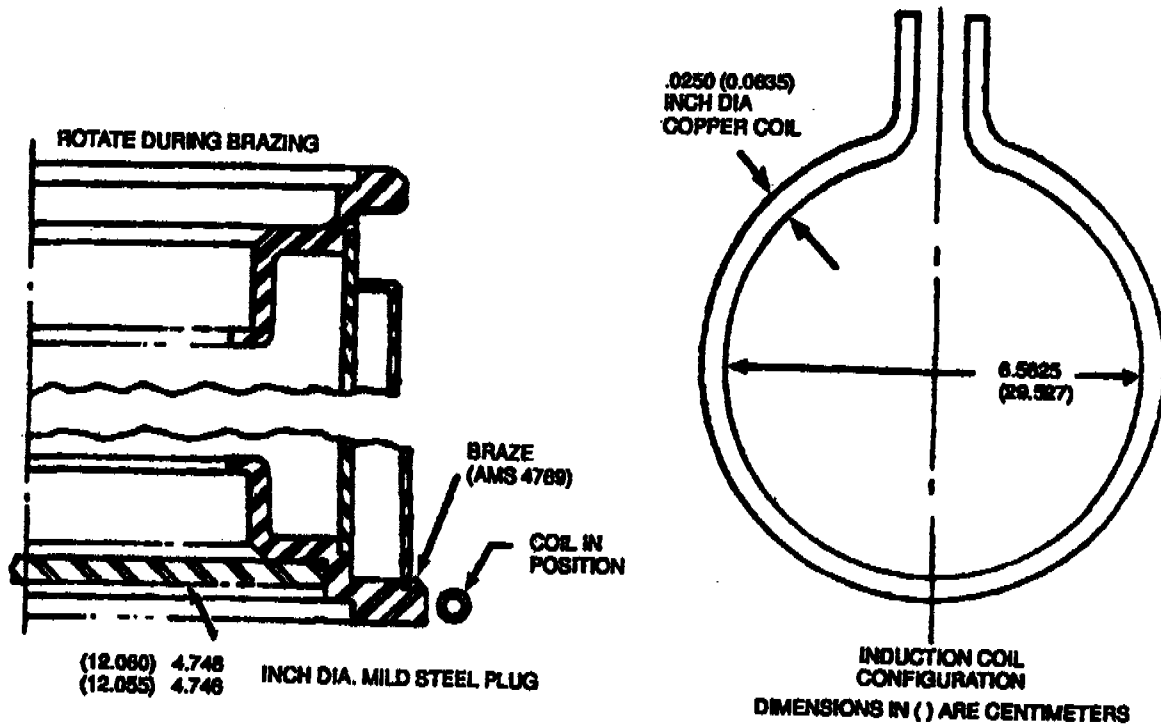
Location of Stiffening Plug and Induction Coil For Brazing Baffle Housing.
